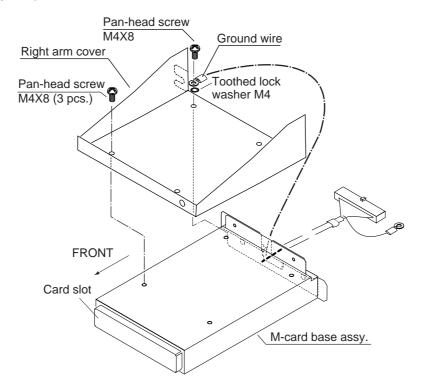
Fastening the M-card base assy. to the right arm cover
